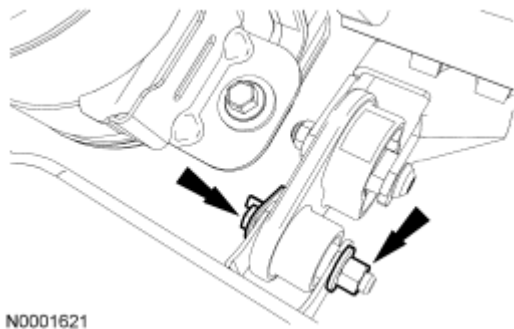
Locating Front Transaxle Stabilizer Bolt & Nut
